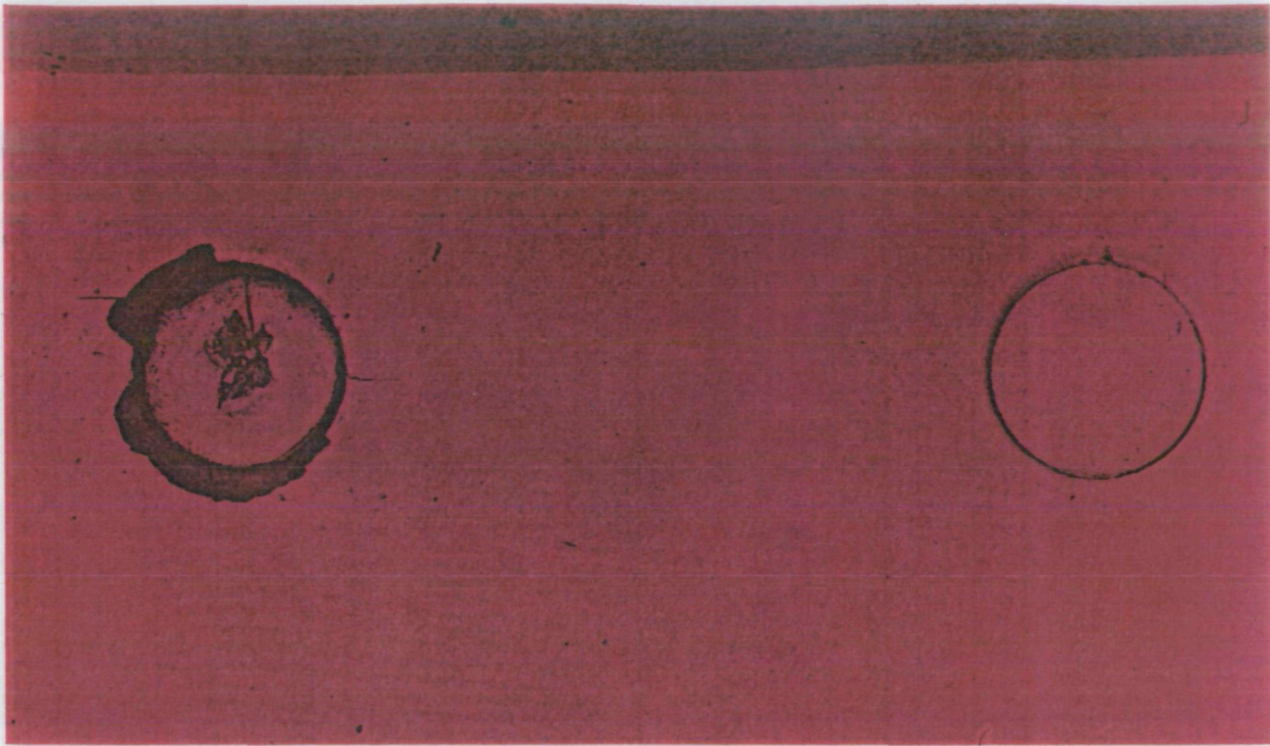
Hole Damage Showing Fastener Pullthrough
